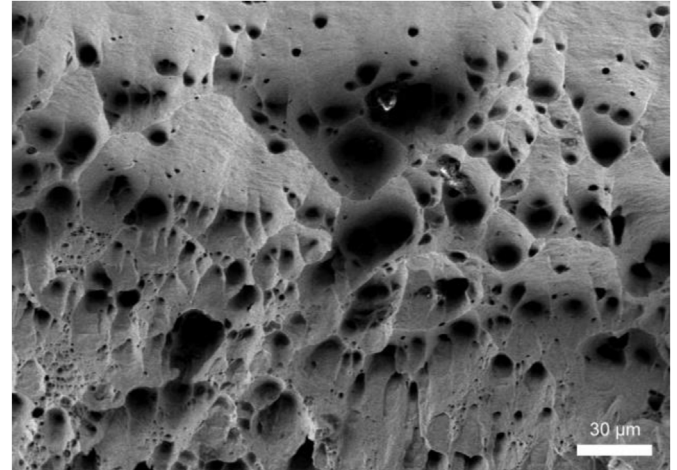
SEM analysis of the fracture surface of the Cu/SS weld. Both weld series presented the same fracture mechanism.
